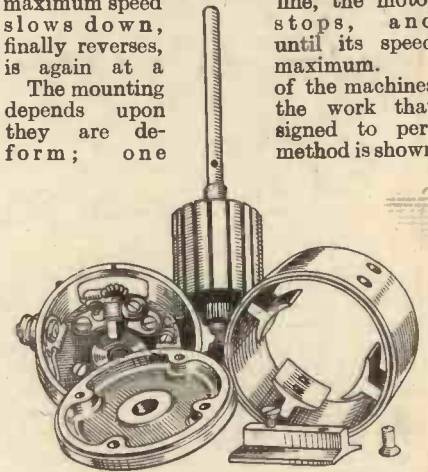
Parts of a 6-volt four-pole starter motor ready for re-winding.
